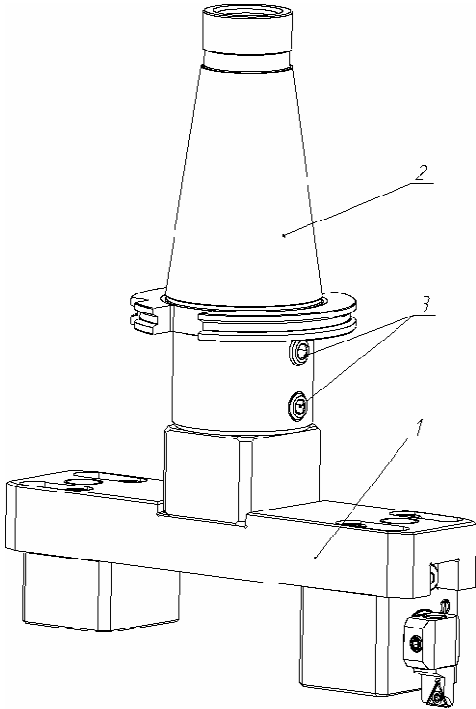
The boring machine module for processing of holes in a range of 240 + 300 mm
